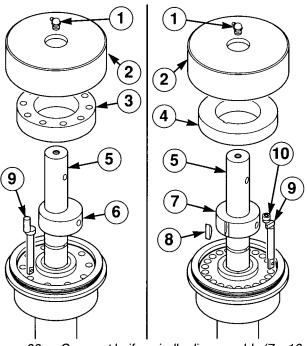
Crosscut knife spindle disassembly (7—16 knife spindle, left; 22 knife spindle, right). (1) Grease Fitting, (2) End Cap, (3) Crank Bearing Block, (4) Cam, (5) Shaft, (6) Eccentric, (7) Cam Hub, (8) Key, (9) Crank Pin. (10) Roller, Crank Pin.
